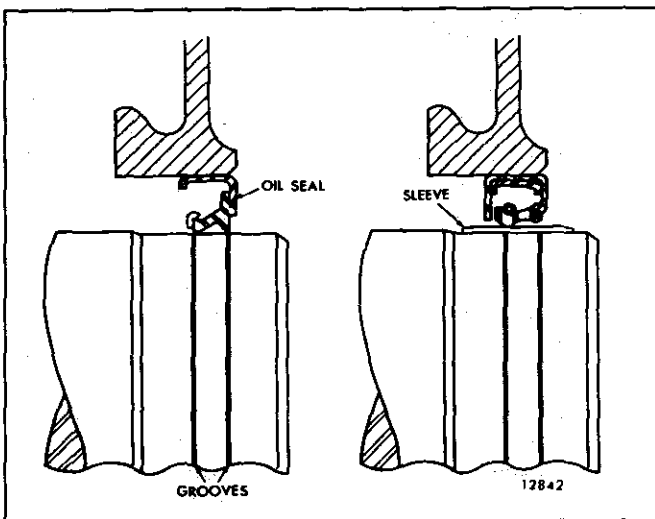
Use of Rear Oil Seal Sleeve on Grooved Crankshaft (In-line and 6V-53 Engines)
